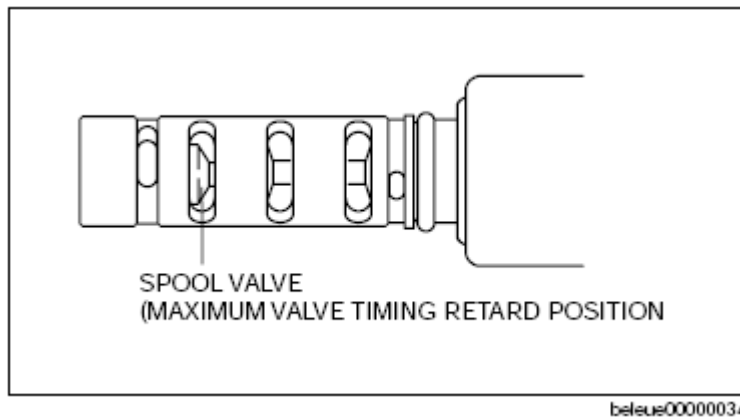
Inspecting Spool Valve In OCV Is In Maximum Valve Timing Retard Position
